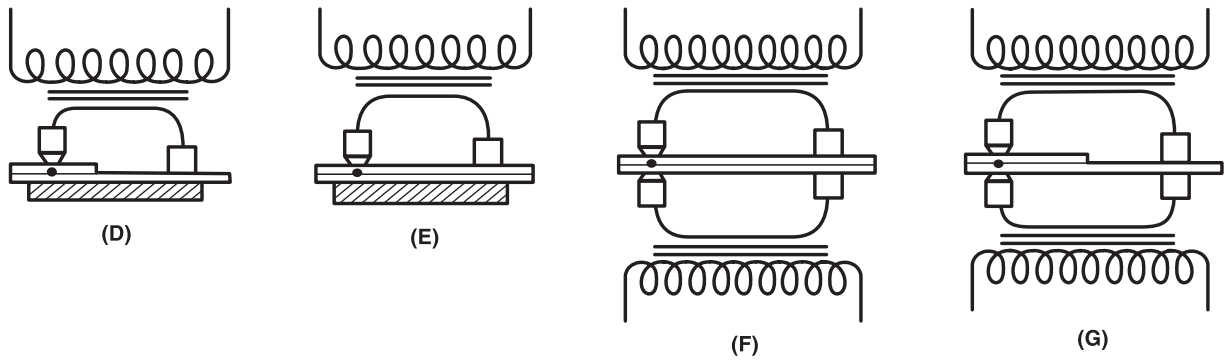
Typical Arrangements for Multiple Spot Welding
